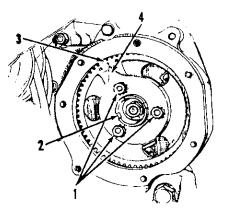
Injection pump drive gear used on early B-275 tractors equipped with injection pump having pneumatic governor.
